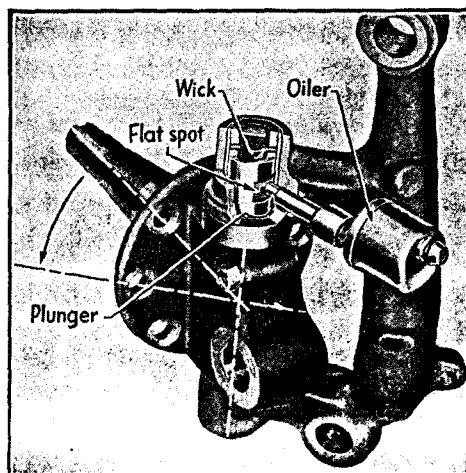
Wheel spindles provided with pressure reservoir type oiler, must be turned at right angles to the car before removing the steering knuckle pin.
